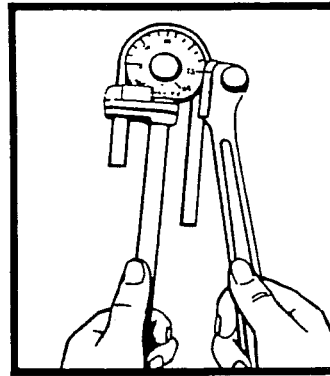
Bends to any angle up to 180° may readily be made with this IMPERIAL tube bender.
